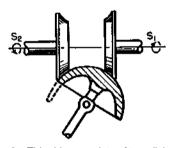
This drive consists of two spherical cones on intersecting shafts and a free roller.
